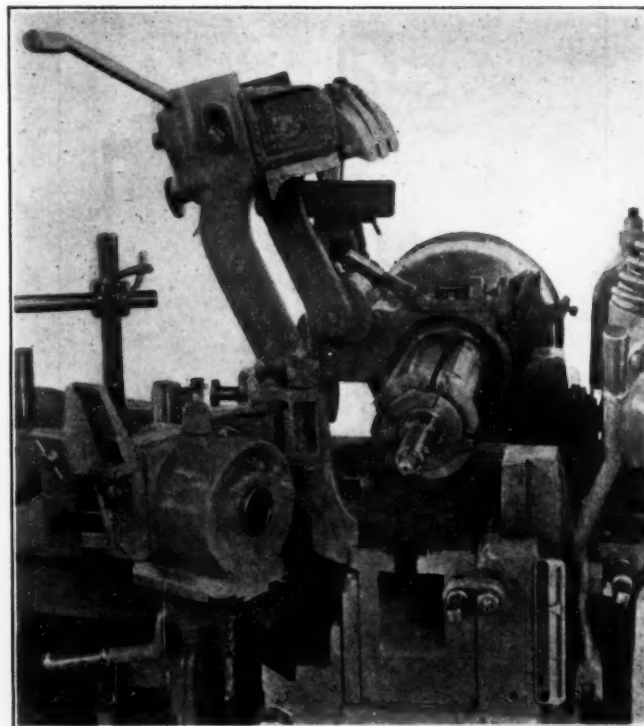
OUTBOARD BEARING FOR TOP CUTTER HEAD ON ELECTRIC MOLDER SHOWING SPINDLE WITH CONCENTRICALLY EXPANDING DEVICE
